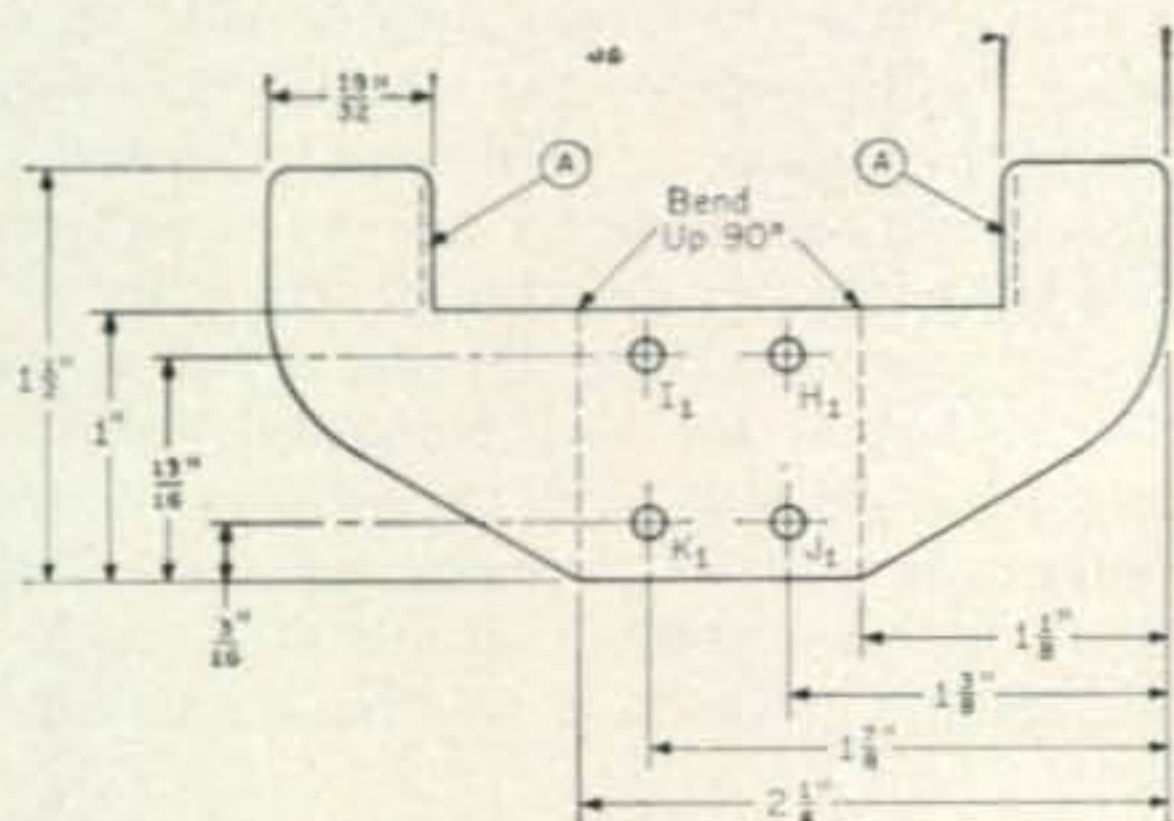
Details of the squaring guide made from #16 gauge mild steel. Both sides at A, are to be filed to match lower die heel piece after assembly. Holes H₁, I₁, J₁, and K₁ are made with a #18 drill.
